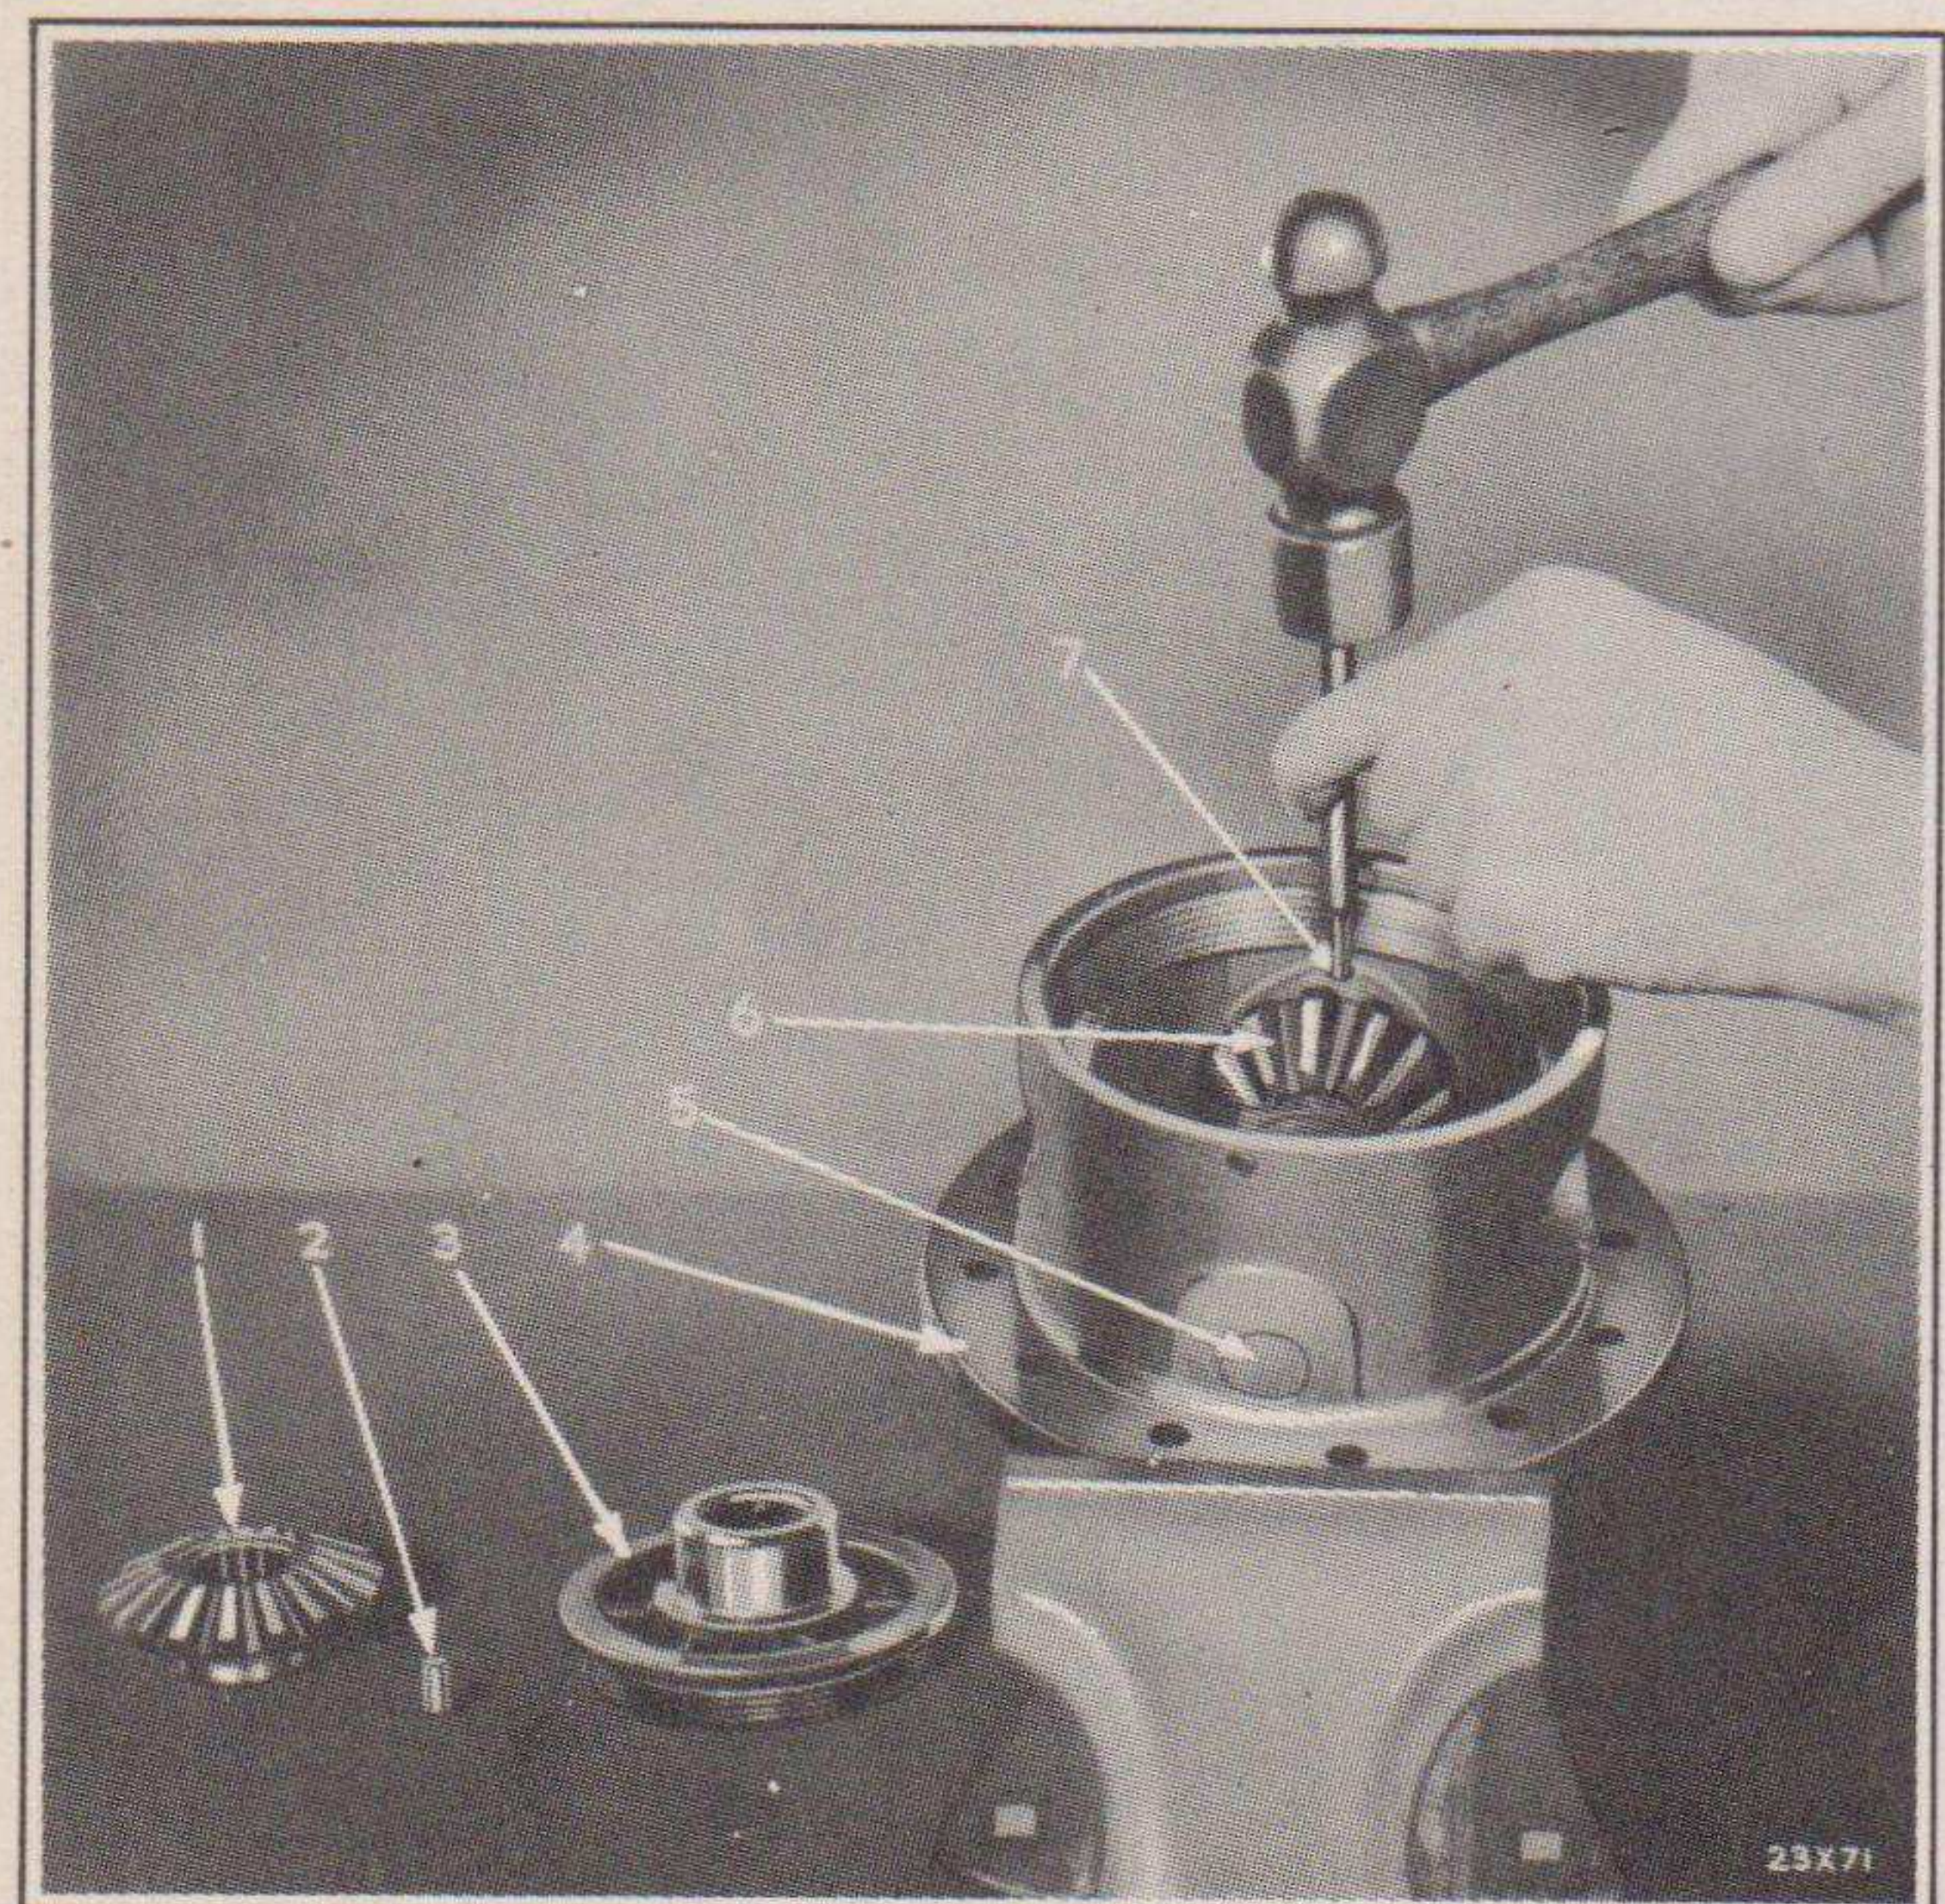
Removing Differential Pinion Shaft Lock Pin
